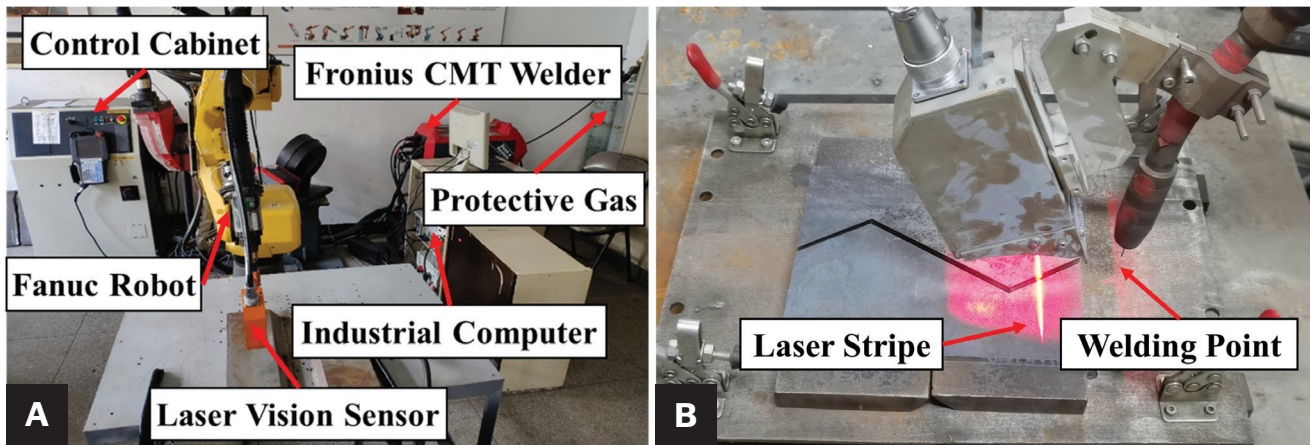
A — Laser vision-based seam tracking system in Ref. 13; B — relative position between weld torch and laser stripe in seam tracking system.
